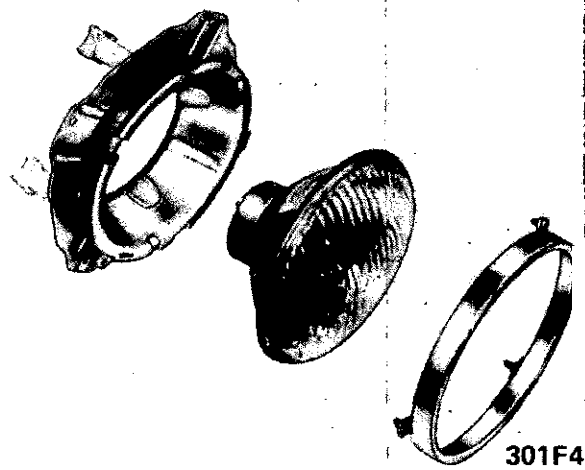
F-4 - Headlight Assembly - Models 57-57R
